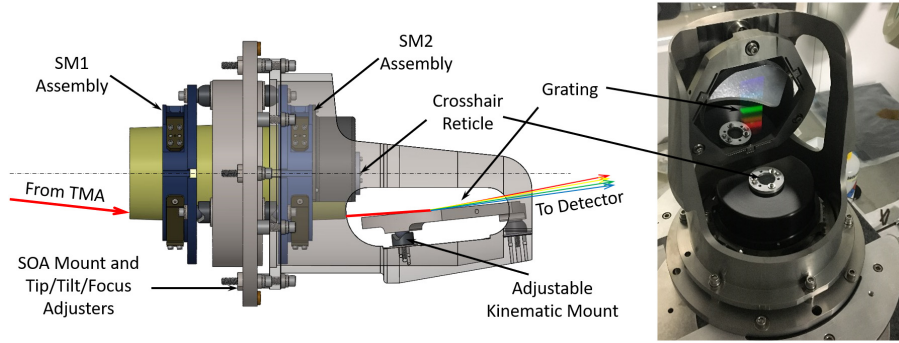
The spectrograph optics assembly (SOA). The spectrometer mirror pair and the grating assembly attach to a common interface flange. The spectrometer mirror pair mounts and grating mount all have an adjustable mechanical interface to aid in their respective alignments.
